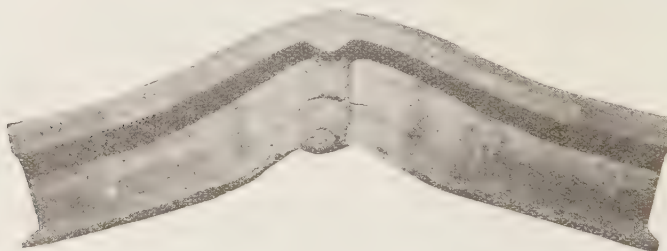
VI. — Thermit-fusion weld on 46-kgr. (92.7 lb.) standard French rails, the head of which was hardened after rolling. The weld was annealed.
